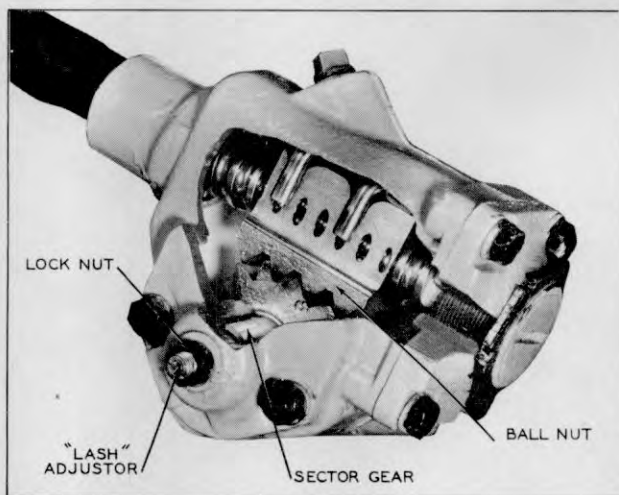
Steering Gear Lash Adjustment (Sector Gear)
